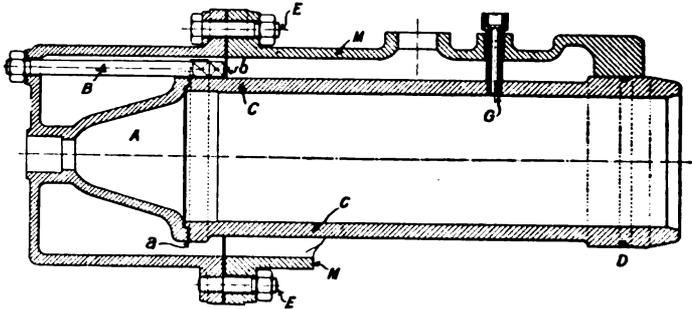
Detail of Liner Joint, with Bolts through Breech Casting.
